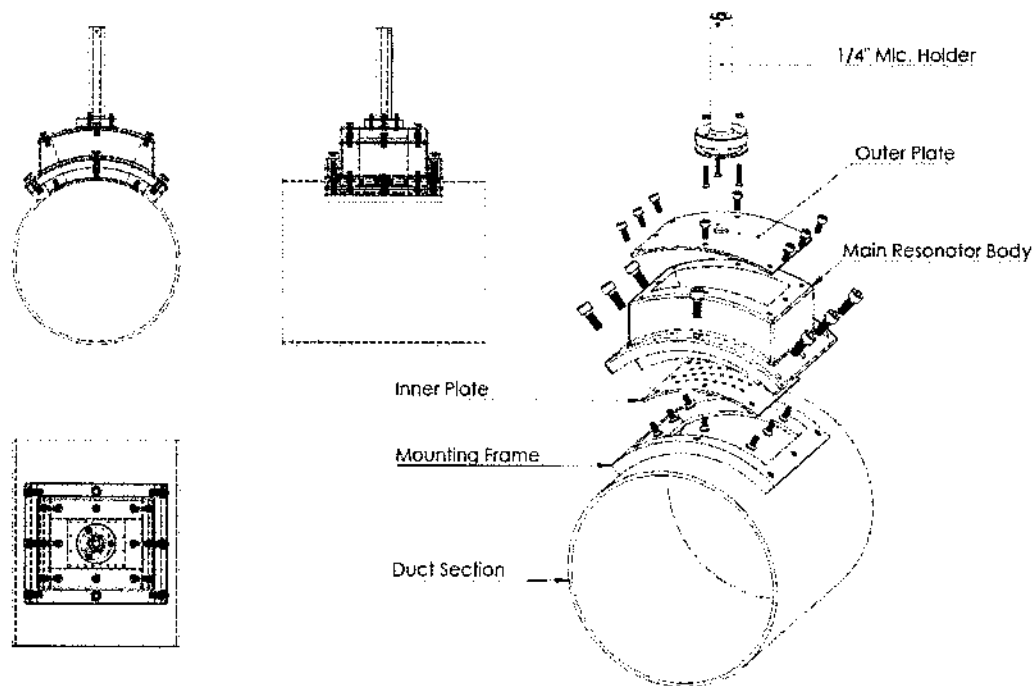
Assembly CAD drawing of the Resonator design (Houston et al., 2015b)
